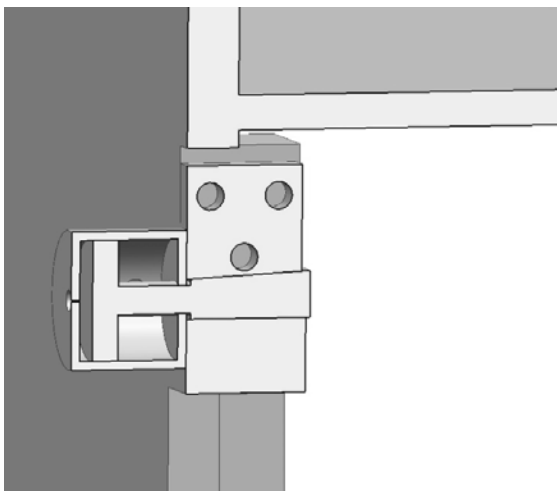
Variant 2- force on wedge mechanism is caused by screw (cutted view)
